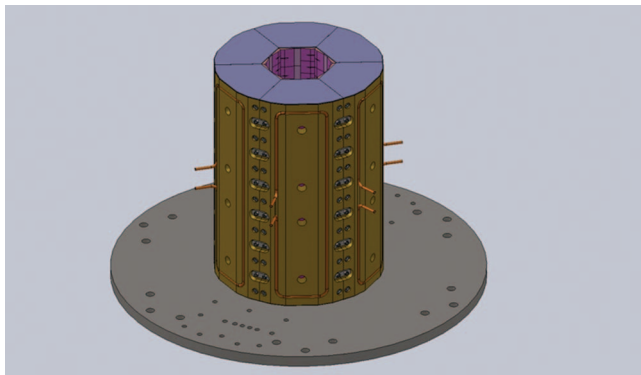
(Color online) Layout of the assembled sextupole magnet in Solidworks.
